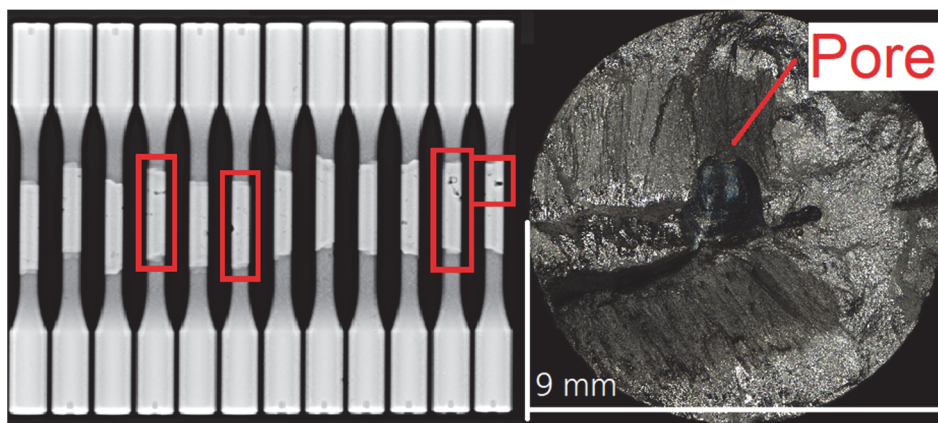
Left: X-ray film with specimens removed from the integral material state with pores; right: cross section of a failed specimens with a pore in the welding filler.
